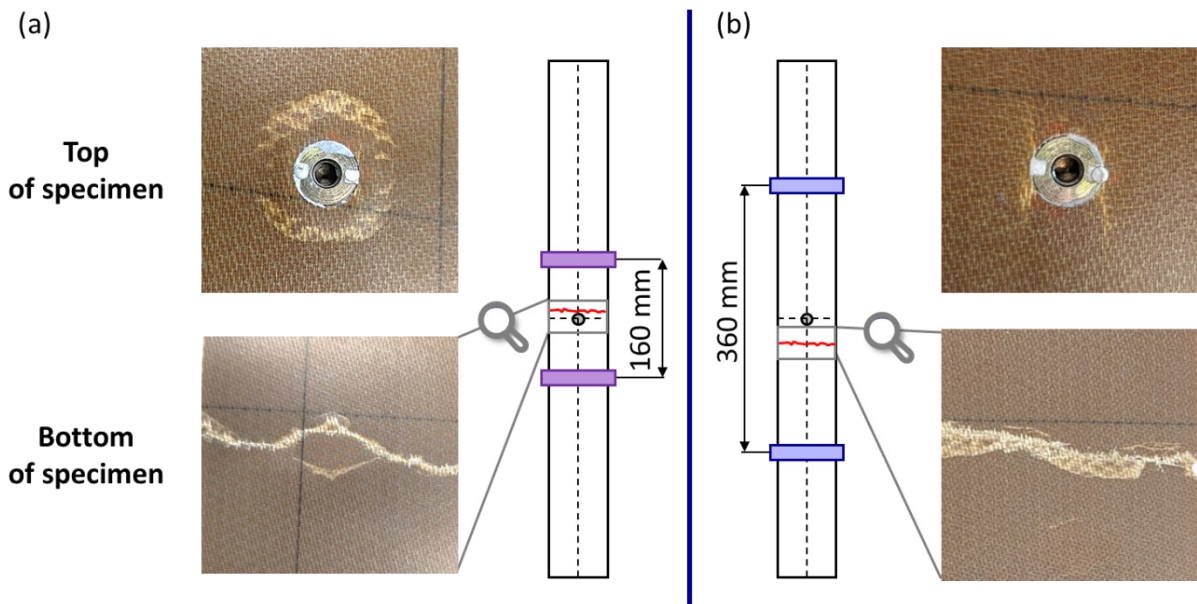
Damage mechanisms in bending pull-out test; (a) Damage in tests with 160 mm roll distance; (b) Damage in tests with 360 mm roll distance.
